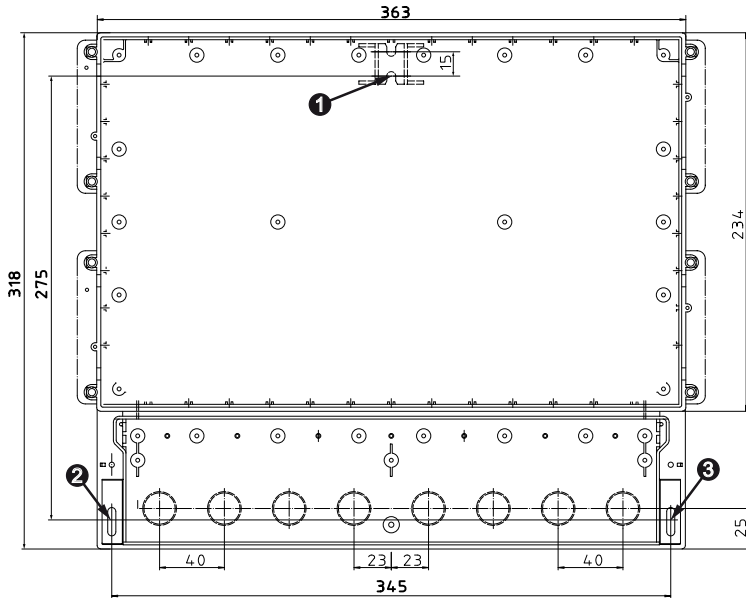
Rear side of the device with the upper ❶ and lower ❷ ❸ mounting holes
